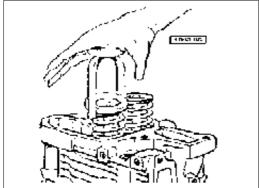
Using no. 5.9030.012.0 tool to remove valves.
